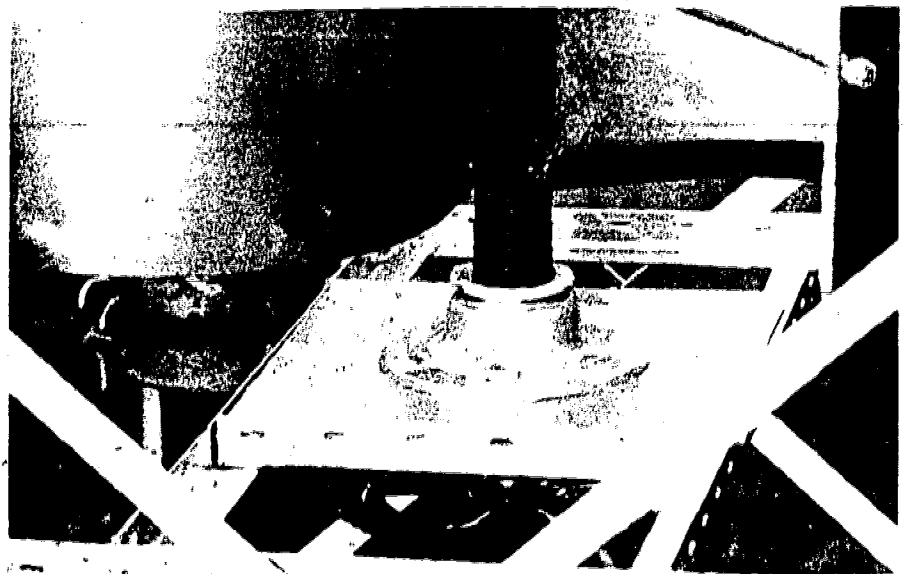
Close-up of top side of drive shaft shows mounting detail of bearing assembly made from cast-off automobile axle hubs.
